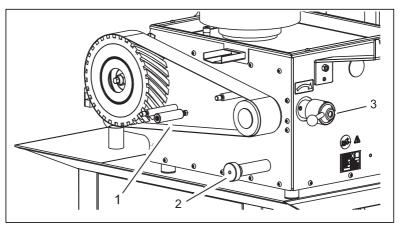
Changing the wet grinding belt on the SM-200 TE
